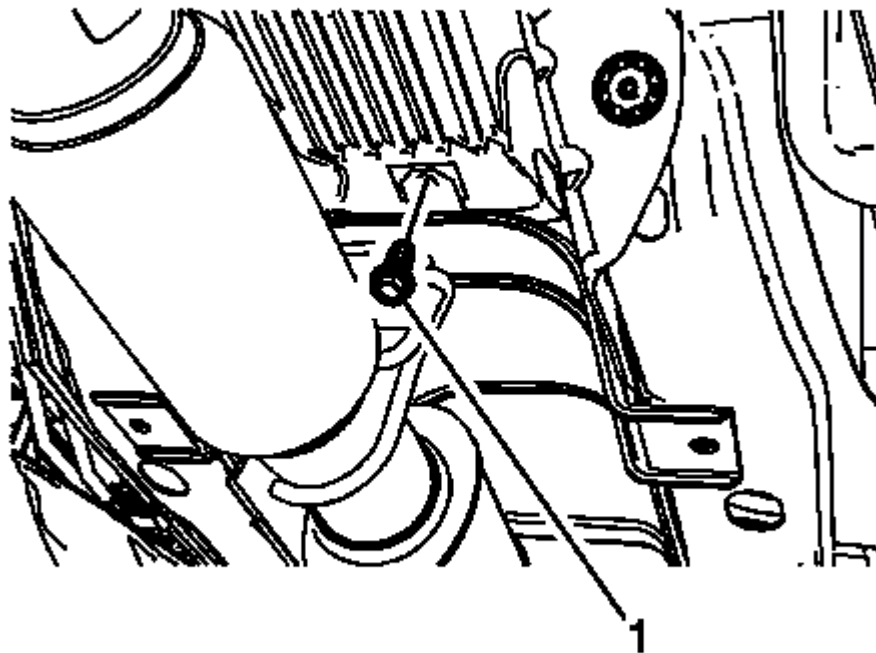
Exhaust Pipe Front Hanger Bracket Fastener
